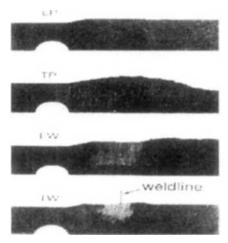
Configuration of fatigue crack growth at PPS parent and weld
